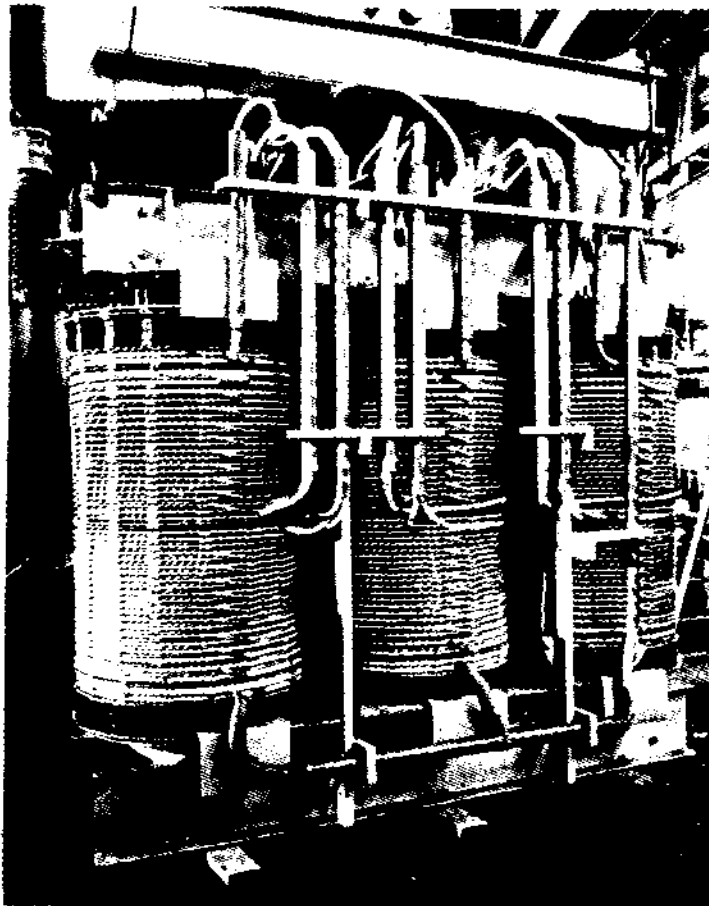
A core type transformer power element assembly, complete prior to tanking with a disk-winding.
